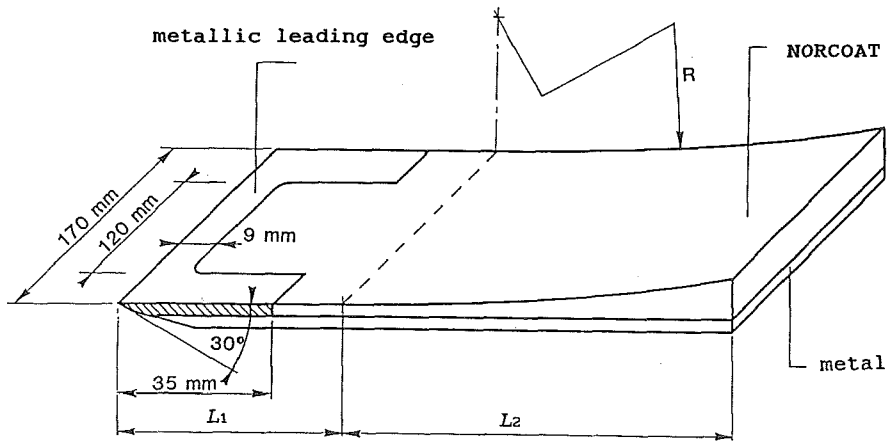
Concave wall model (courtesy of CEAT, Poitiers)
